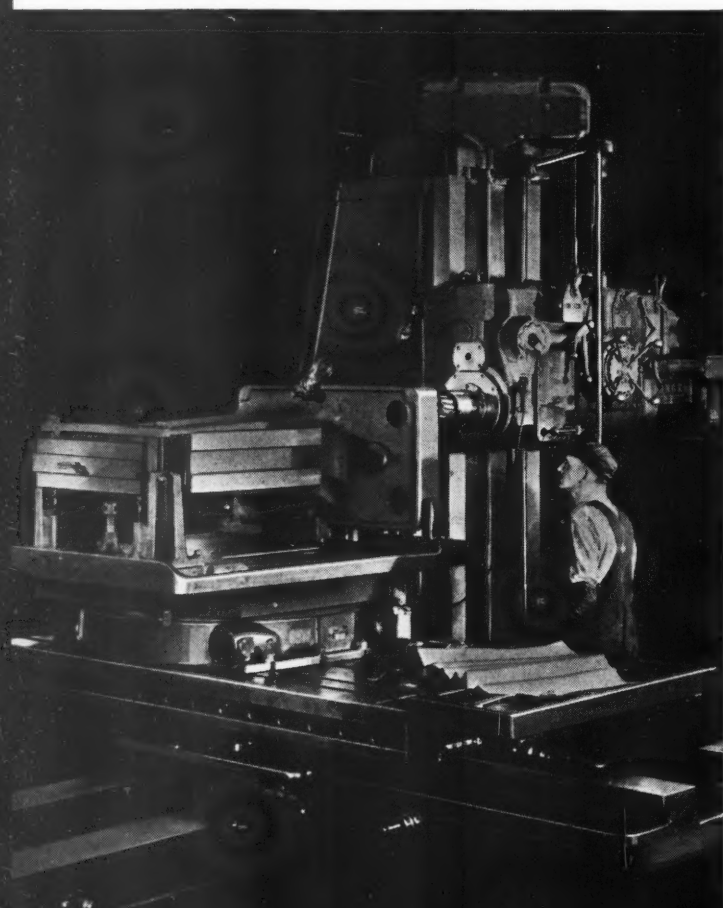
Two bearing holes are simultaneously bored by means of this set-up. The huge casting is mounted on the rotary table of a horizontal boring, drilling, and milling machine
